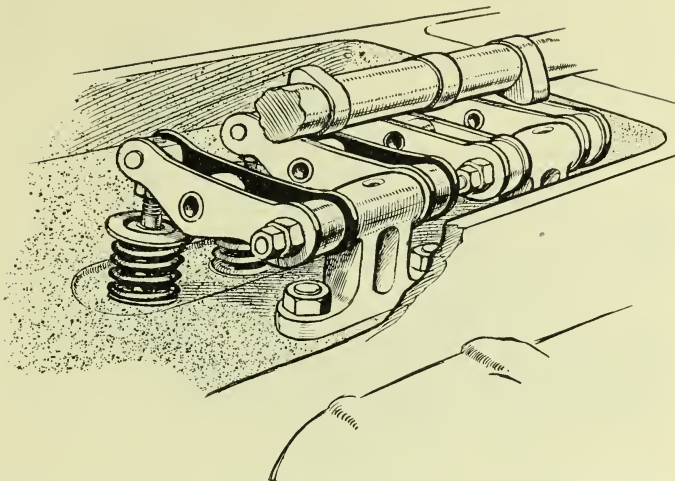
VALVE OPERATING DETAILS OF THE 18-HP. FOUR-CYLINDER PHOENIX ENGINE
